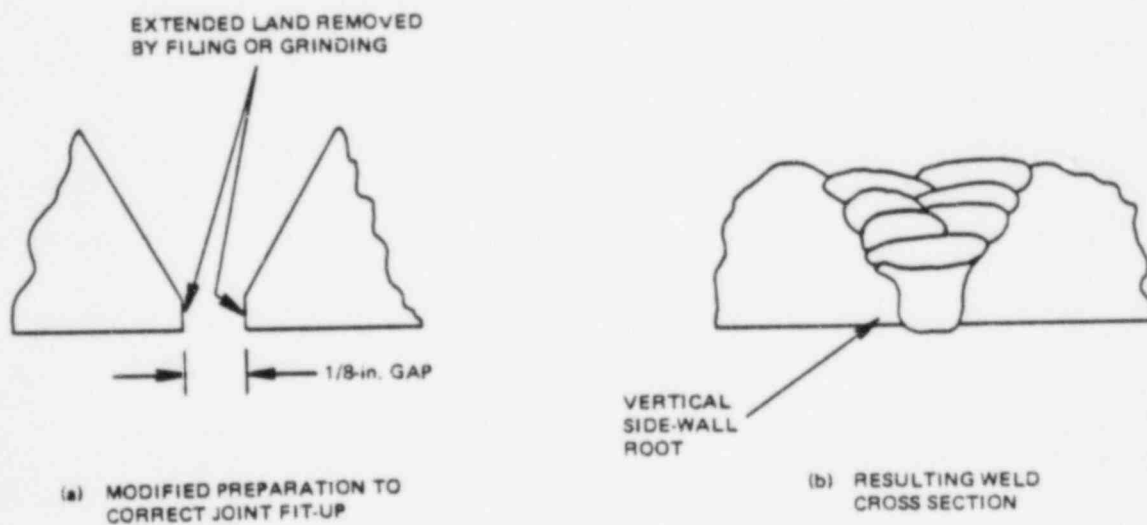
Modified Weld Preparation and Cross-Section
